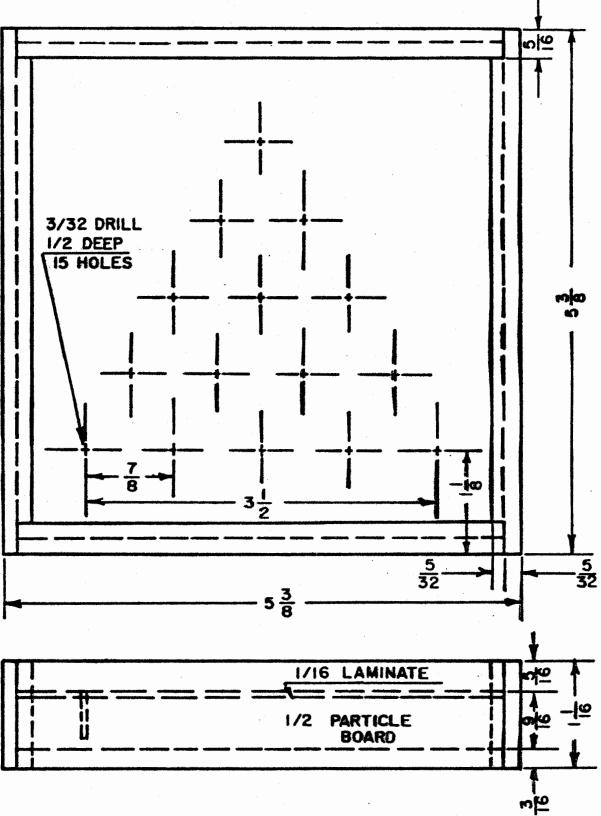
Dimensioned Working Drawing for "Jumping Frog"
